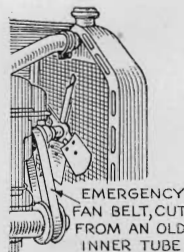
Section cut out of inner tube can be used in place of a worn fan belt
